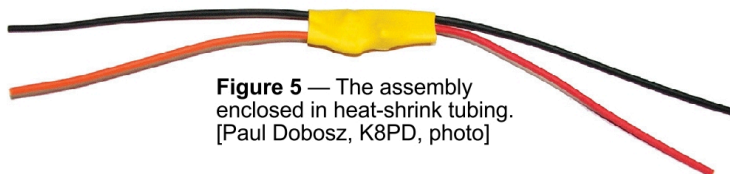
The assembly enclosed in heat-shrink tubing. [Paul Dobosz, K8PD, photo]
